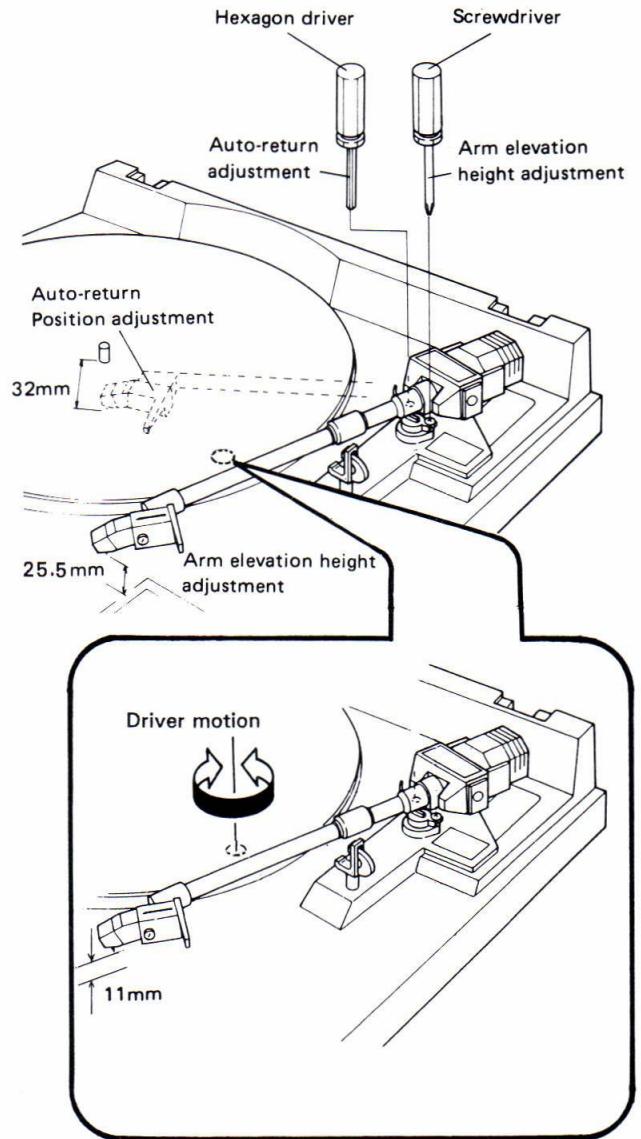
Arm elevation height adjustment and auto-return adjustment
